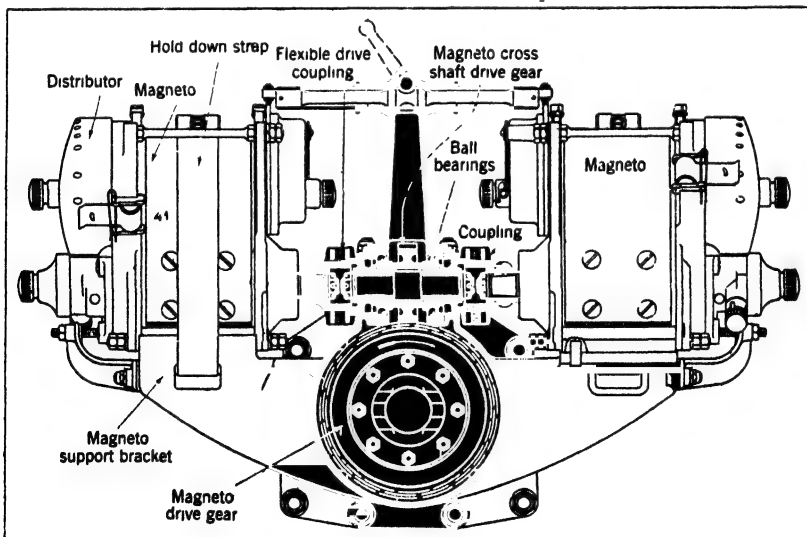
Typical Method of Driving Two Magnetos from a Cross Shaft Driven by Spiral Gearing from the Engine Crankshaft.
